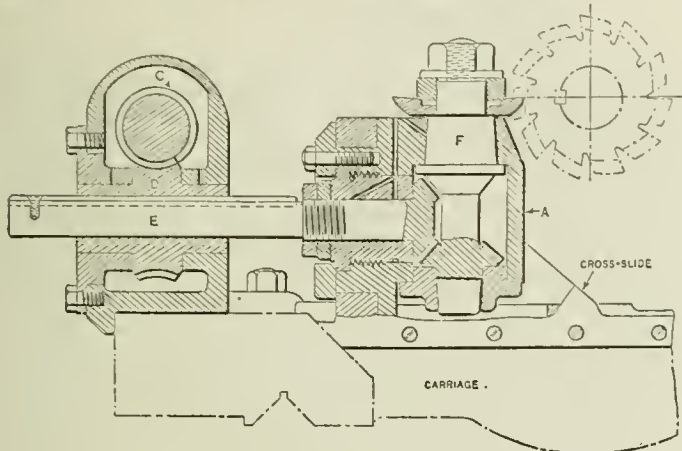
CROSS-SECTIONAL VIEW THROUGH THE CUTTER HEAD AND DRIVING UNIT OF THE SPECIAL GENERATING ATTACHMENT
